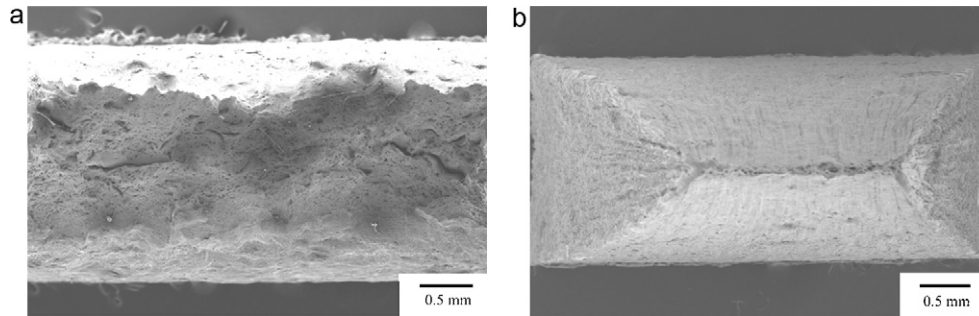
Tensile fracture surfaces of Crofer 22 APU specimens tested at (a) 25 °C and (b) 700 °C.
